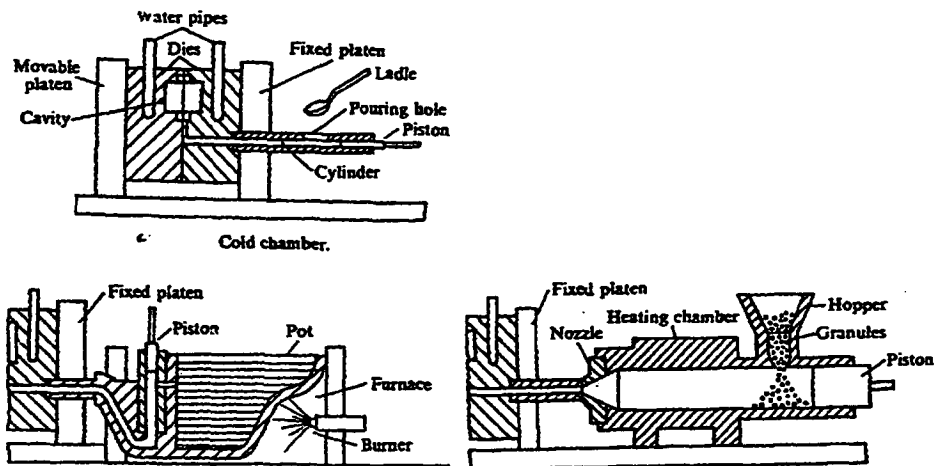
2.8 Cold and Hot Chambers and Injection moulding.
